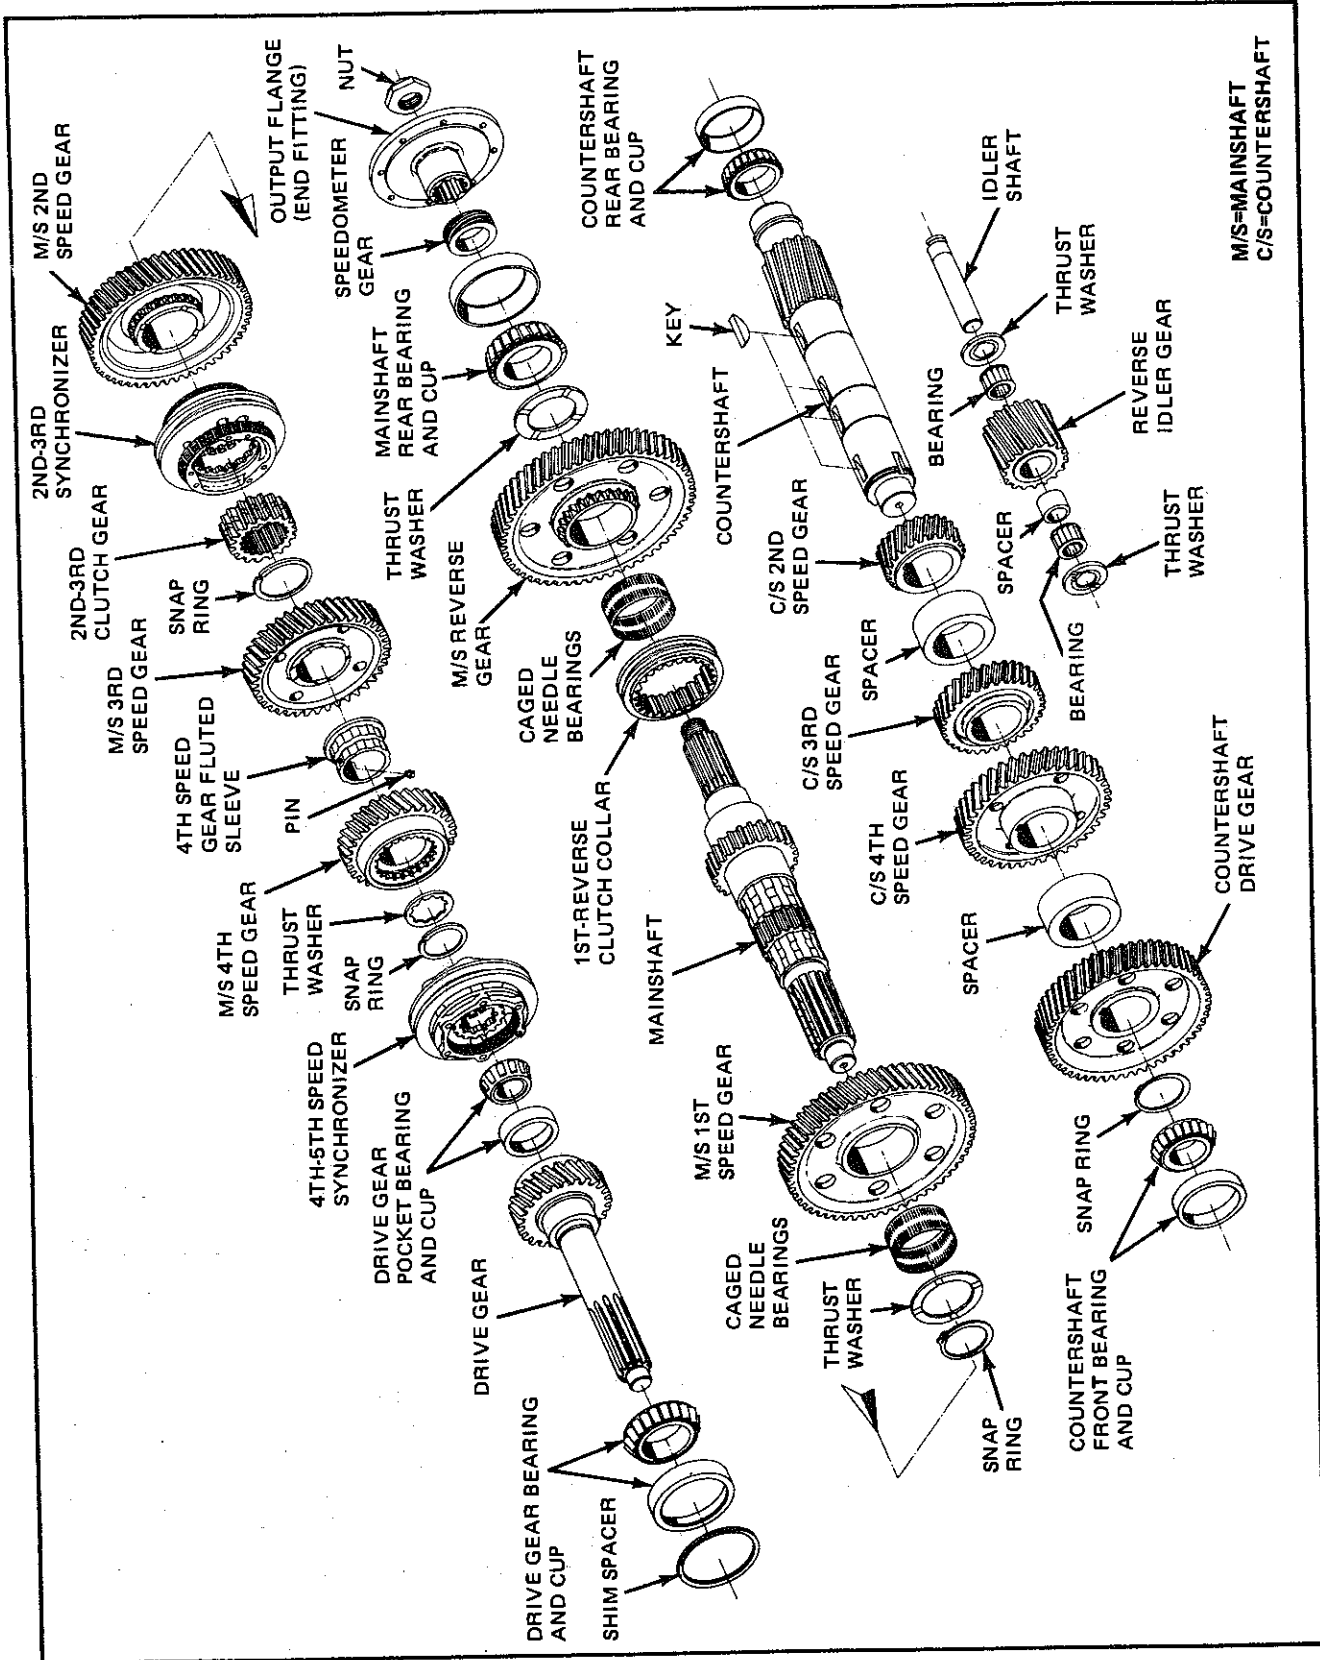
ES65-5 and CM60 Transmission Gears and Related Parts
